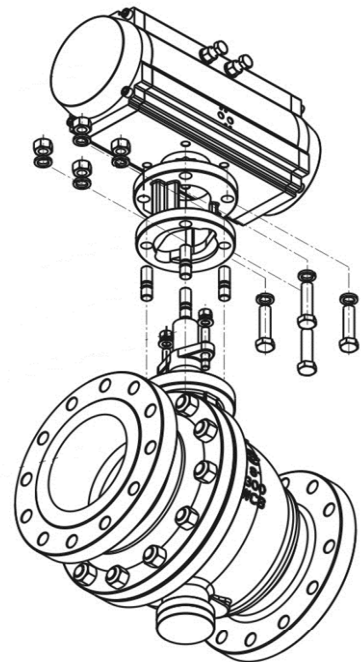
Mounting the actuator on the valve with bracket & coupler
